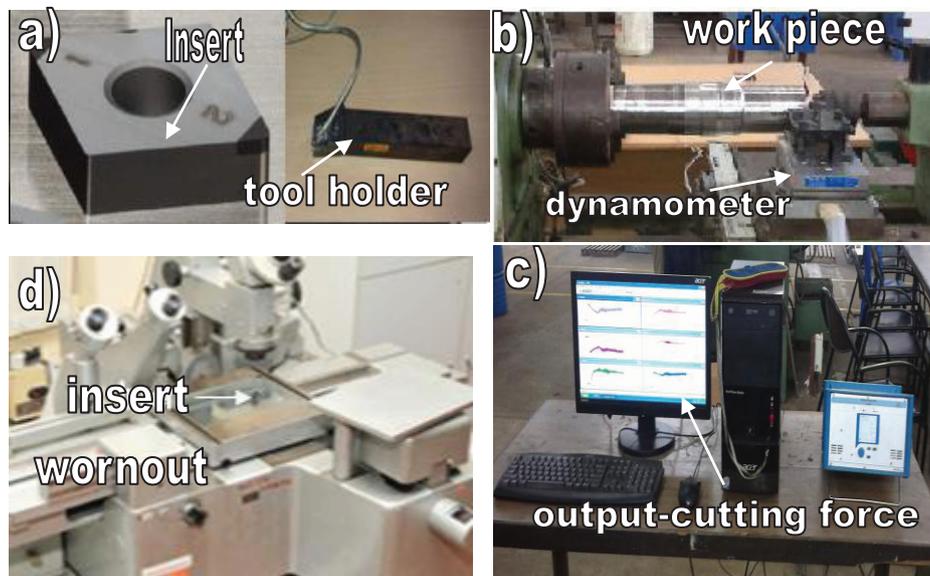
Experimental details. (a) Insert & tool holder, (b) experimental set-up; (c) Flank wear measurement; (d) Dyanaware output-cutting force measurement.
